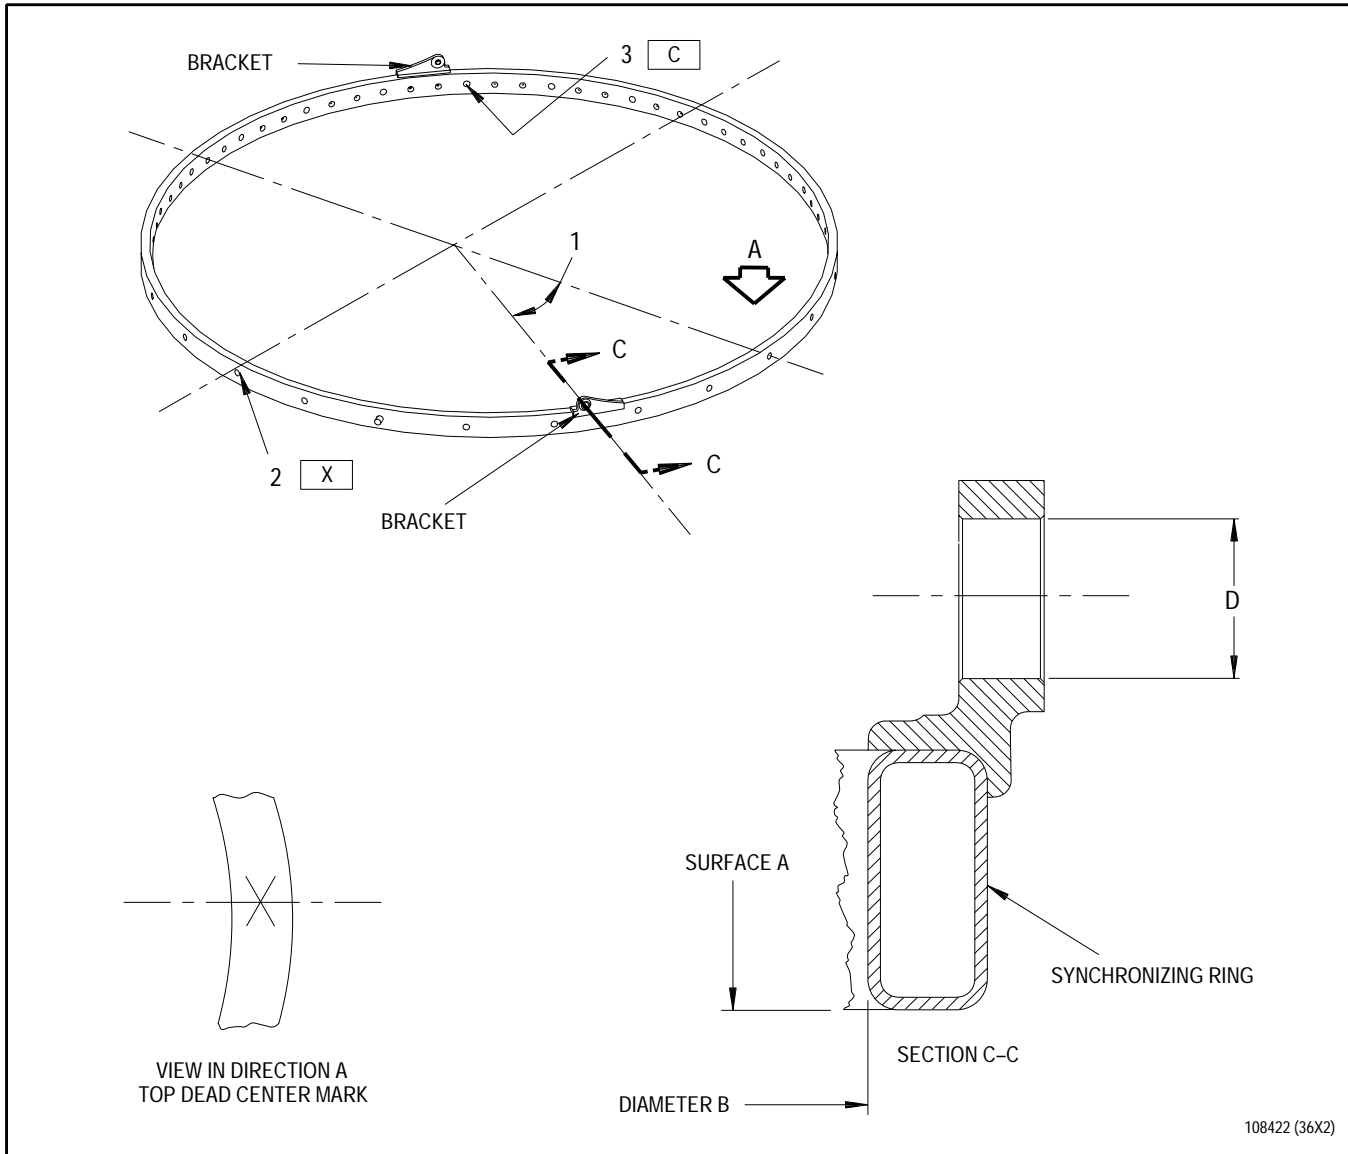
Inlet Synchronizing Ring - Rivet Hole(s) Description
